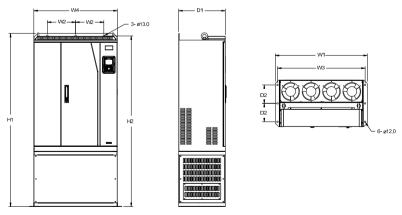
Floor installation diagram of inverters of 660 V, 250 to 355 kW
